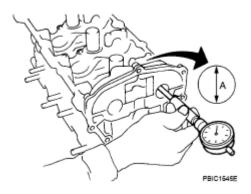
Measuring Inner Diameter Of Camshaft Bracket Using Bore Gauge Courtesy of NISSAN MOTOR CO., U.S.A.
